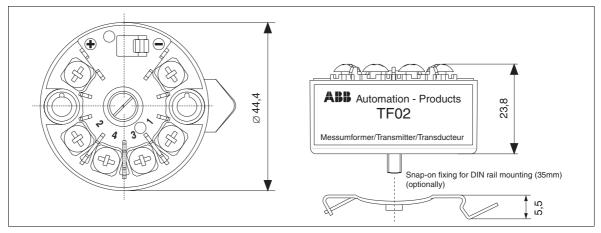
TF02 / TF02-Ex dimensional drawing (all dimensions in mm)
